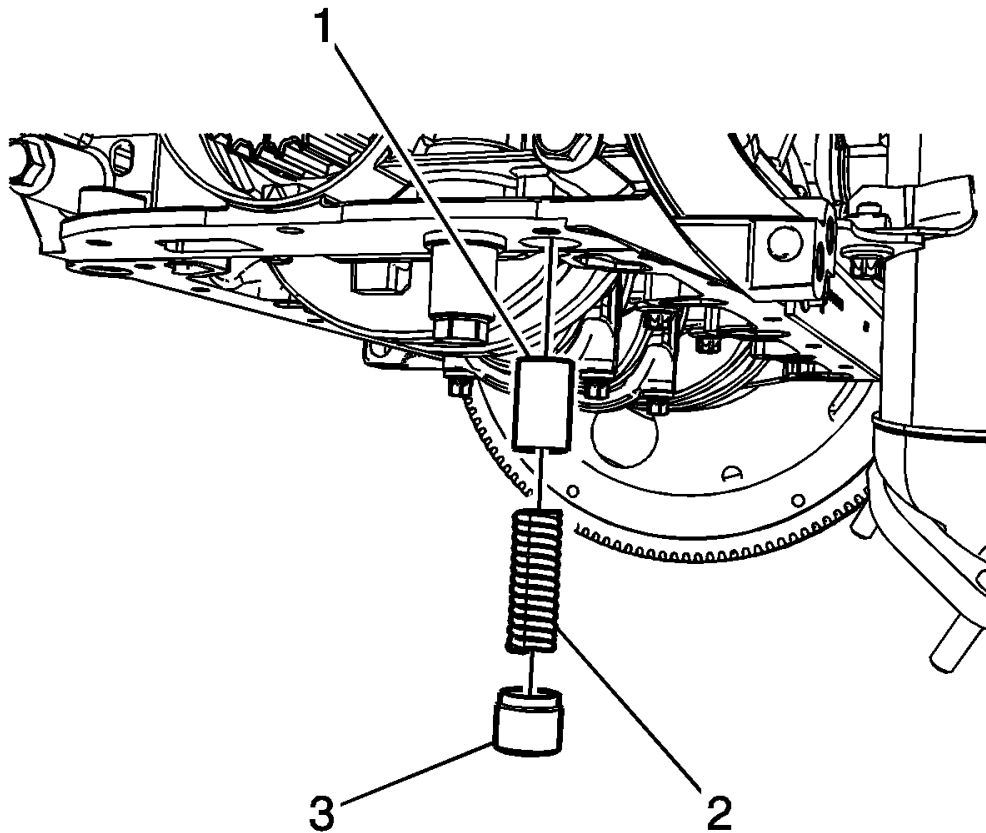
Oil Pressure Relief Valve Plug, Spring & Piston (Secondary)
